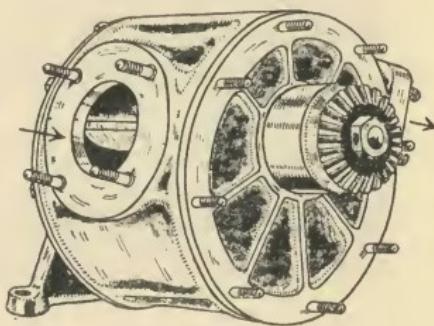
THE COMPRESSOR (EXTERNAL VIEW)
